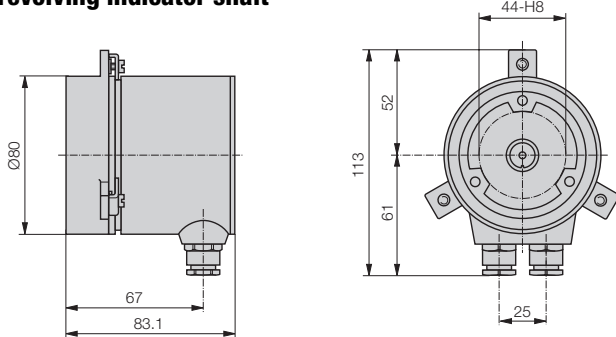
Basic unit for fitting to measuring instruments with revolving indicator shaft. The measuring instrument must have an extended indicator shaft at the back (1.5 mm dia., length 6...7 mm).
